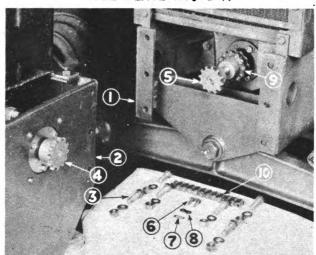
A SERIAL NO. HU-174 AND UP
